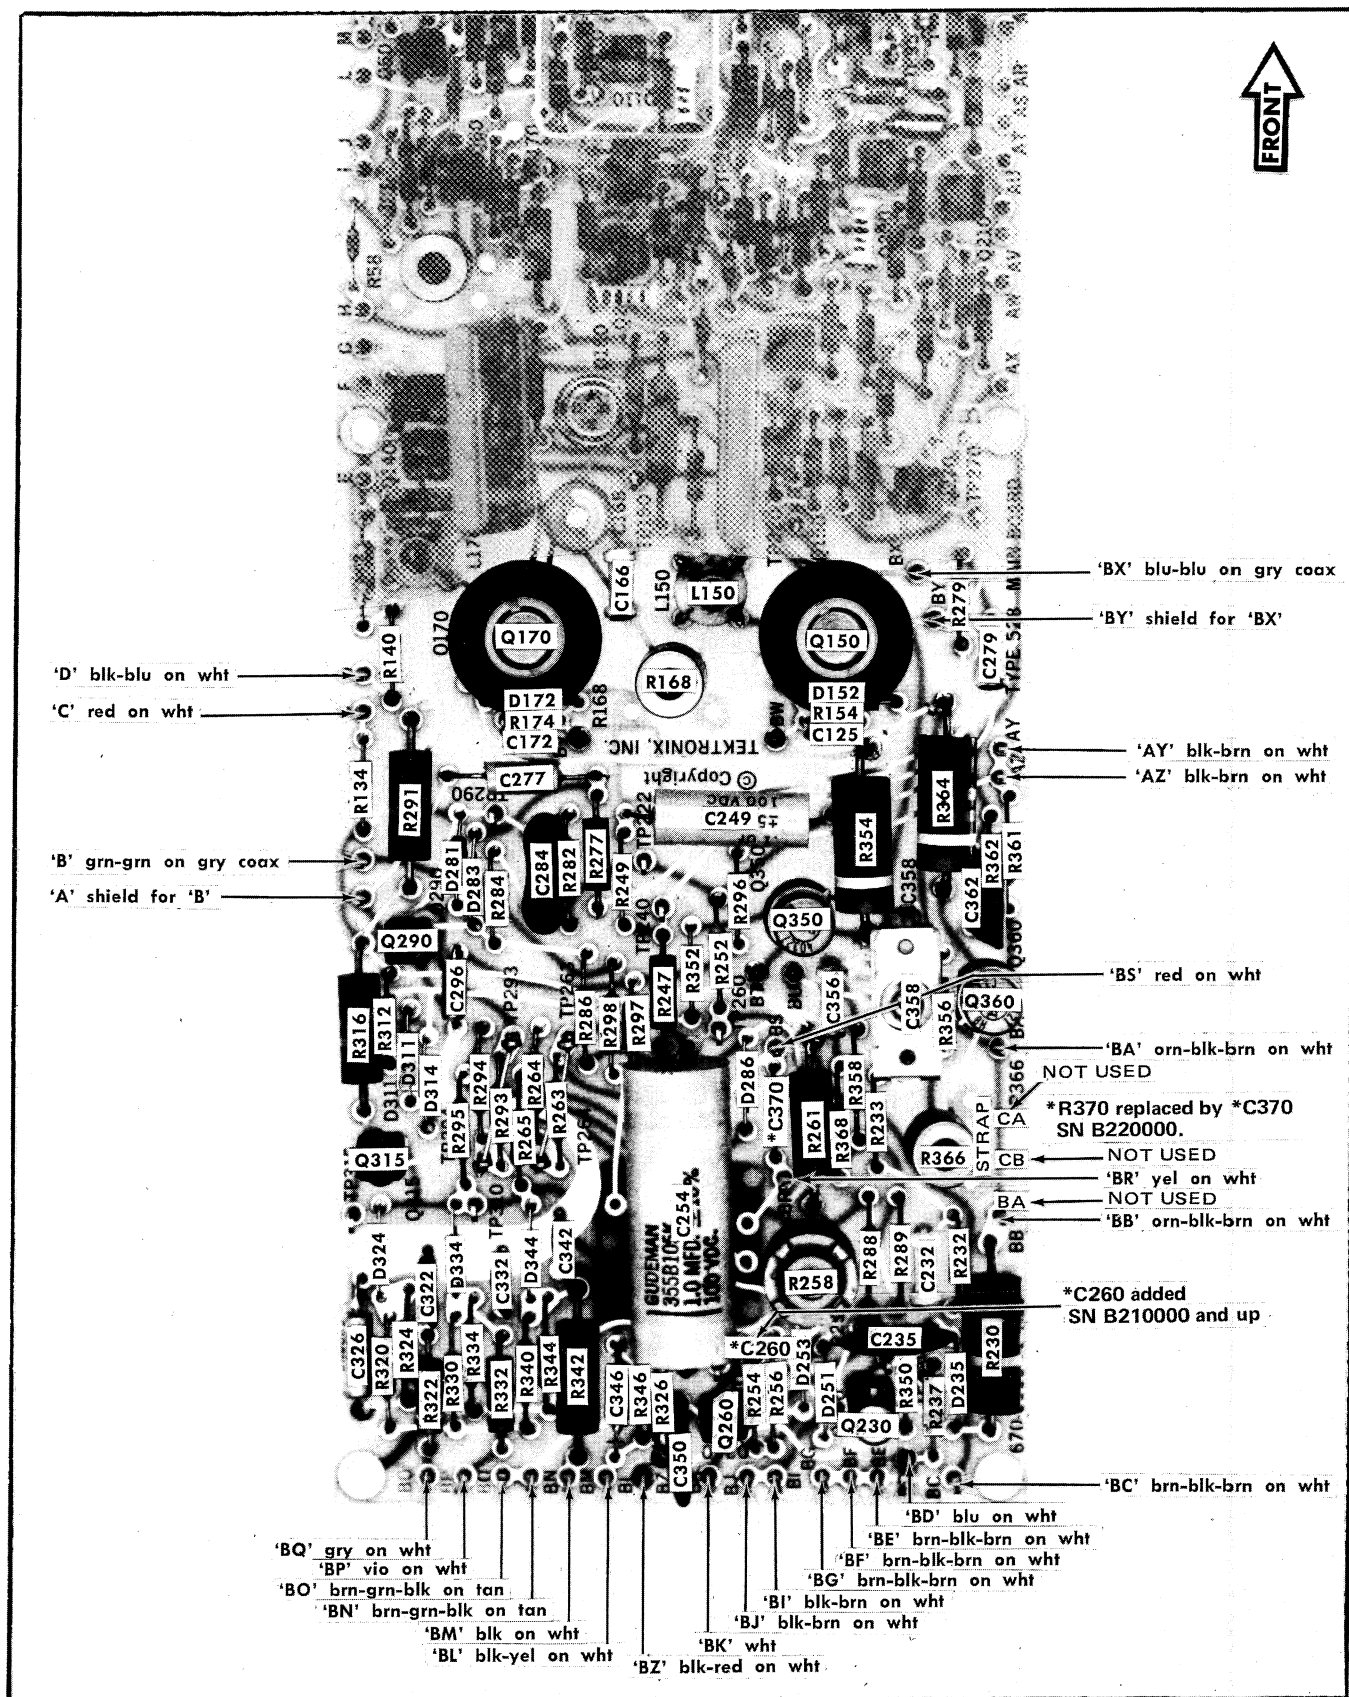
Partial top view of Main board showing components and wire color codes for instruments SN B080560 and up.
